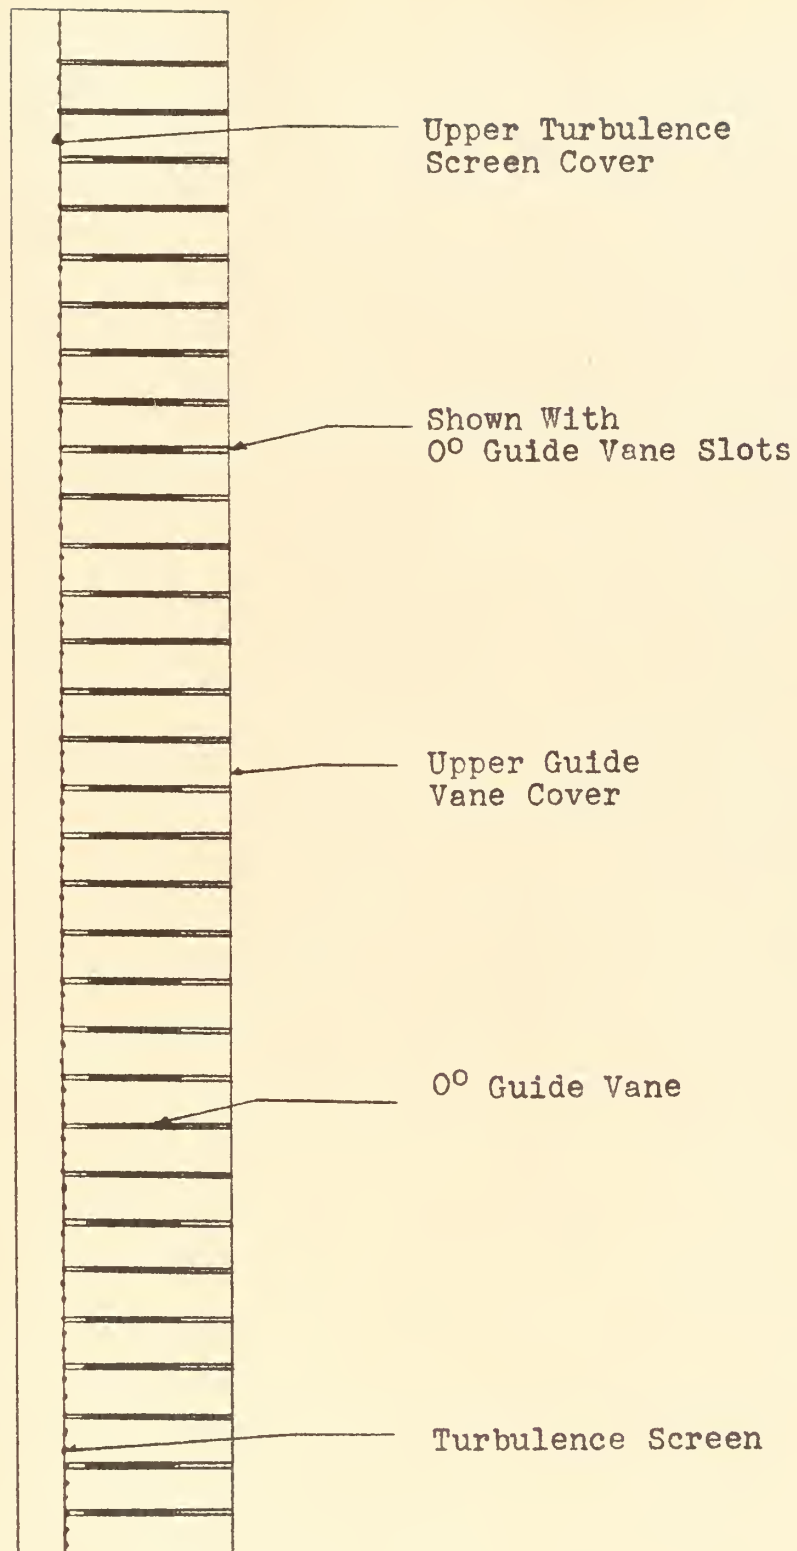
Section A-A, Full Size, Of Inlet Guide Vane Assembly, Cover Plate Not Shown.
